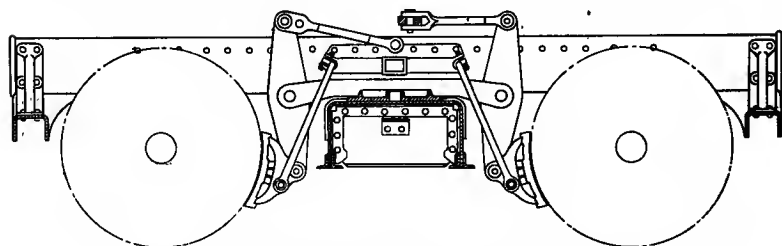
BRAKE RIGGING, STANDARD SINGLE SHOE BRAKE
